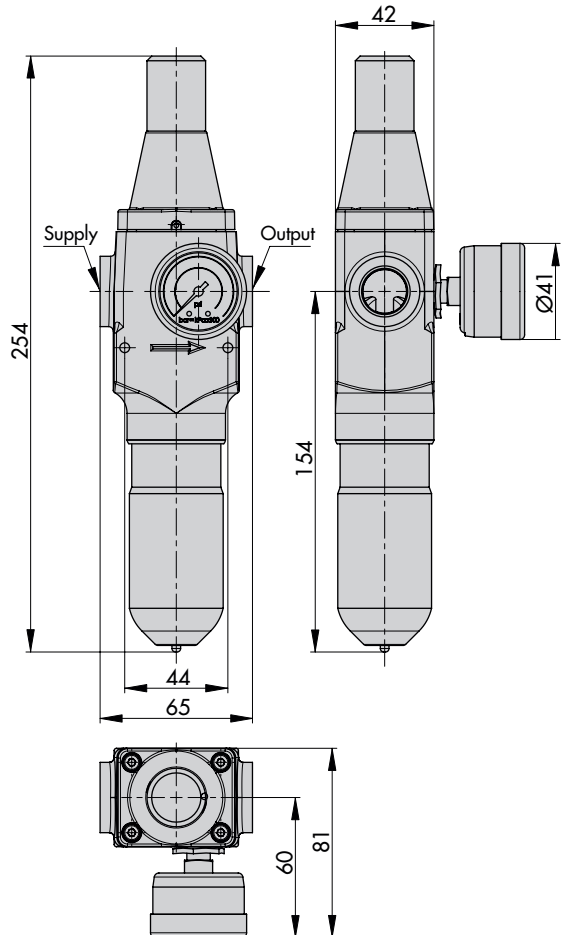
Type 4708-45 Supply Pressure Regulator, stainless steel version
